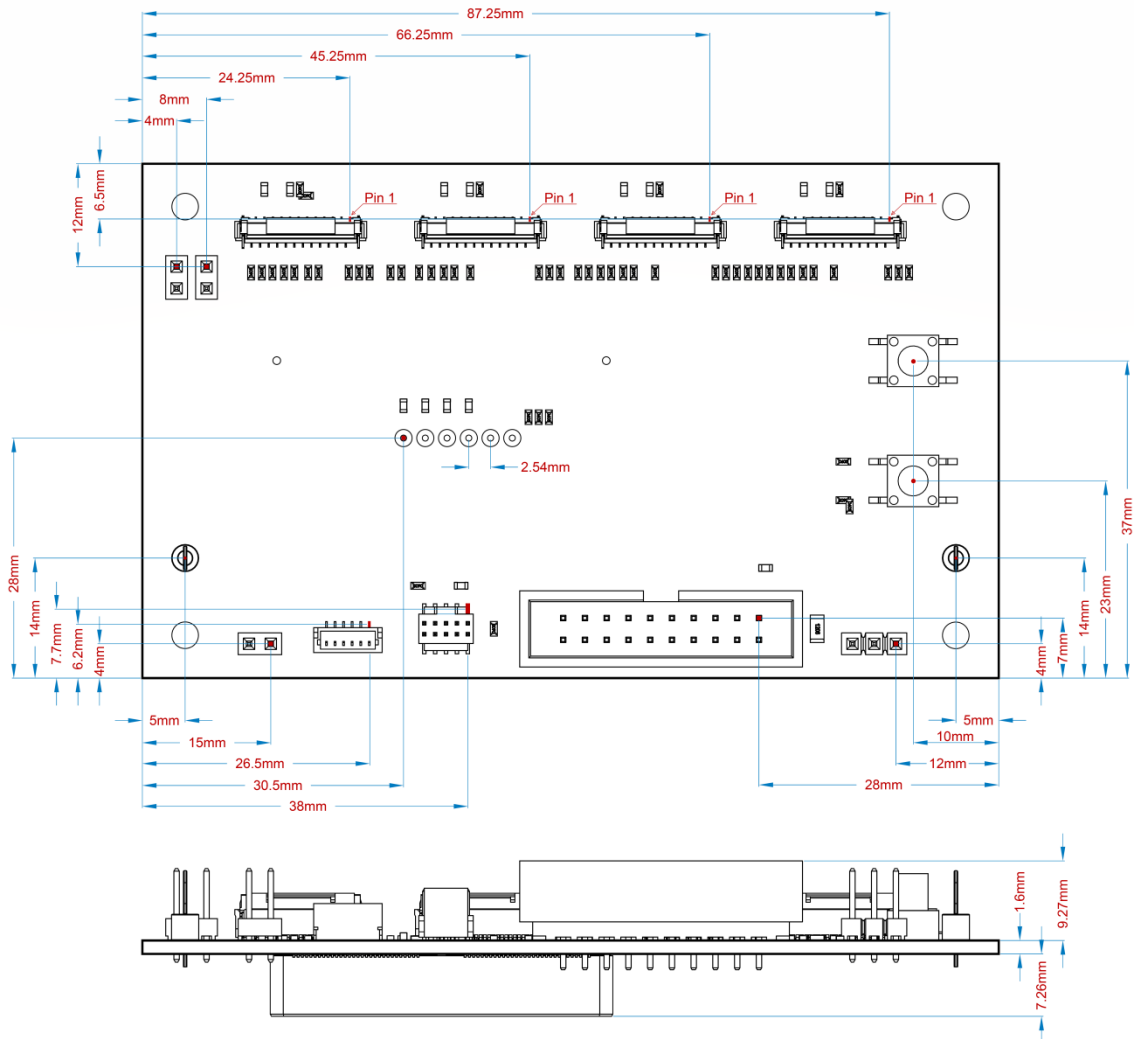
Apalis TK1 Mezzanine Board Mechanical Drawing – Top Side
